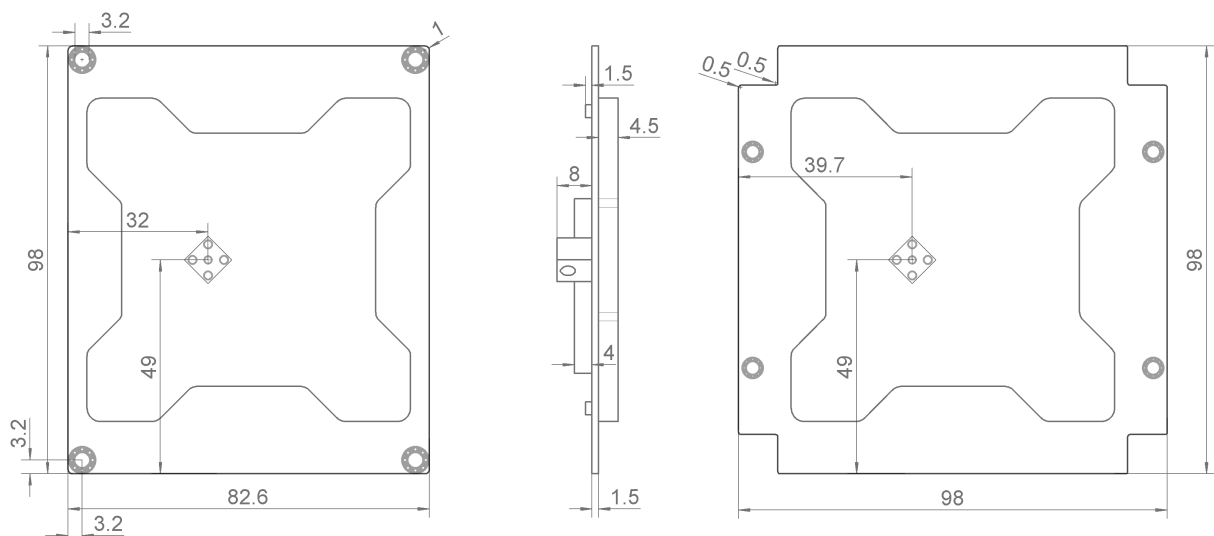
piPATCH-S-(DL/UL) Dimensions drawing in millimeters. X/Y mount (left), profile (center), Z mount (right). Detailed STEP files available for download.
